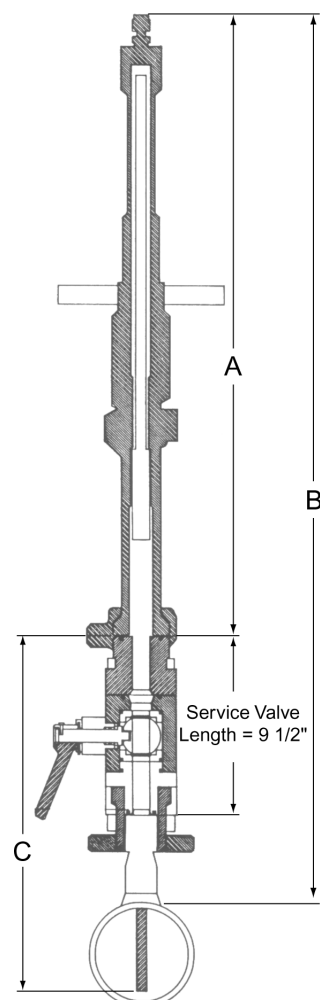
Retrieval Tool / Service Valve Dimensional Schematic
